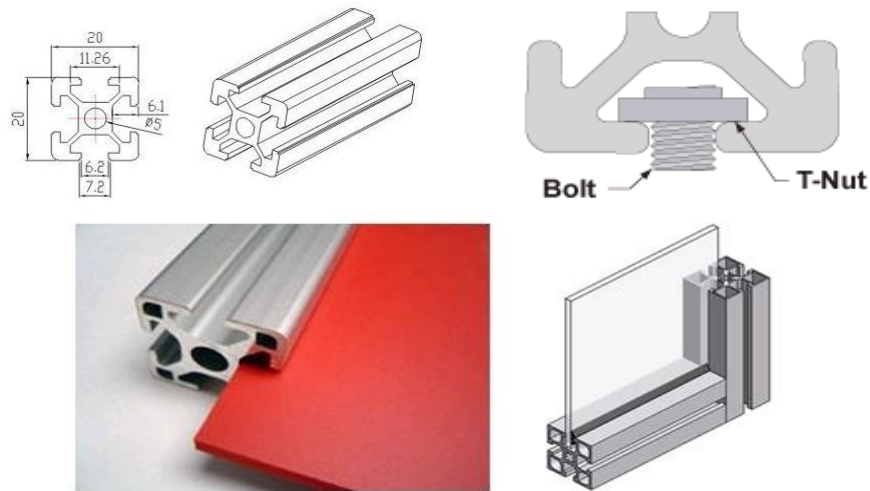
T-Slot Concept and Slotted Aluminum Extrusion
